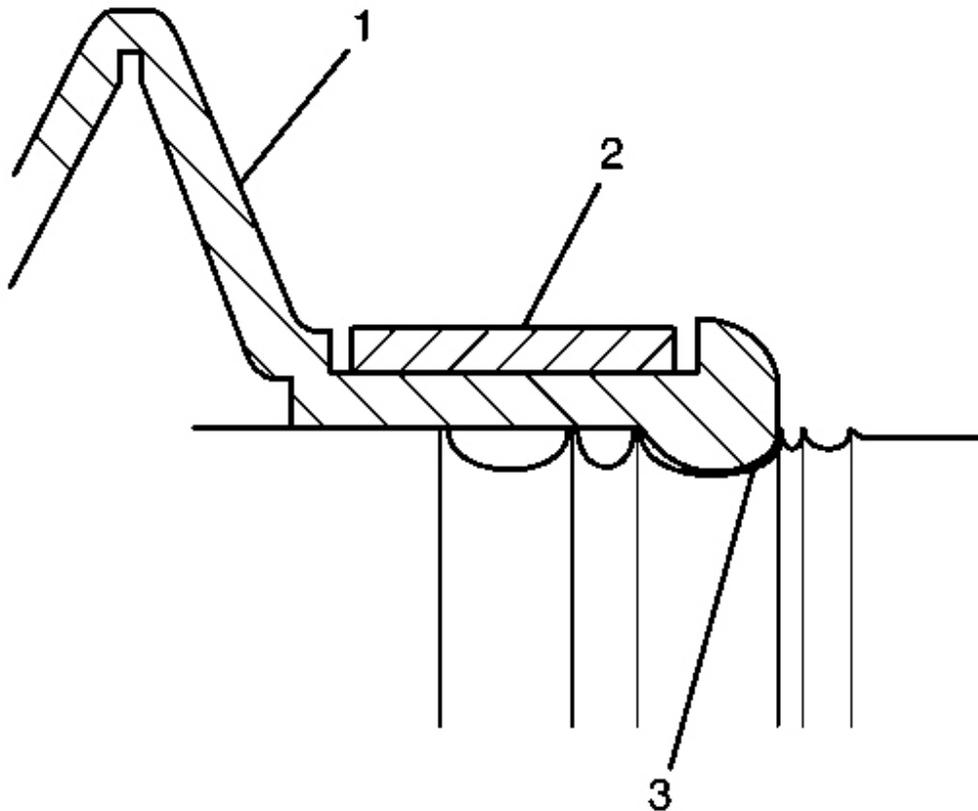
View Of Tripot Spider & Wheel Drive Shaft Bar
